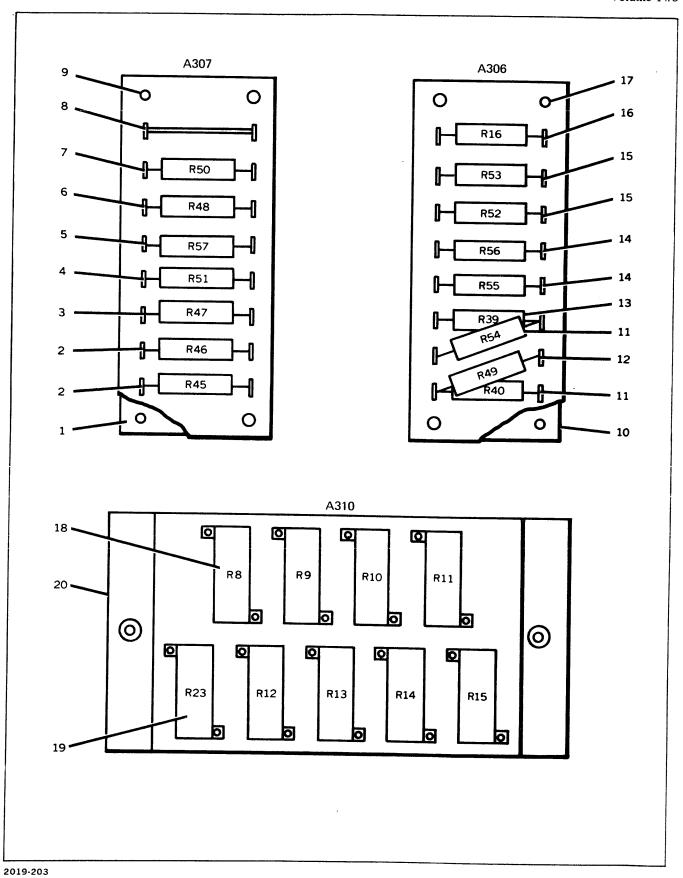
A306, A307, and A310 Component Board Assemblies, Parts Identification Diagram
